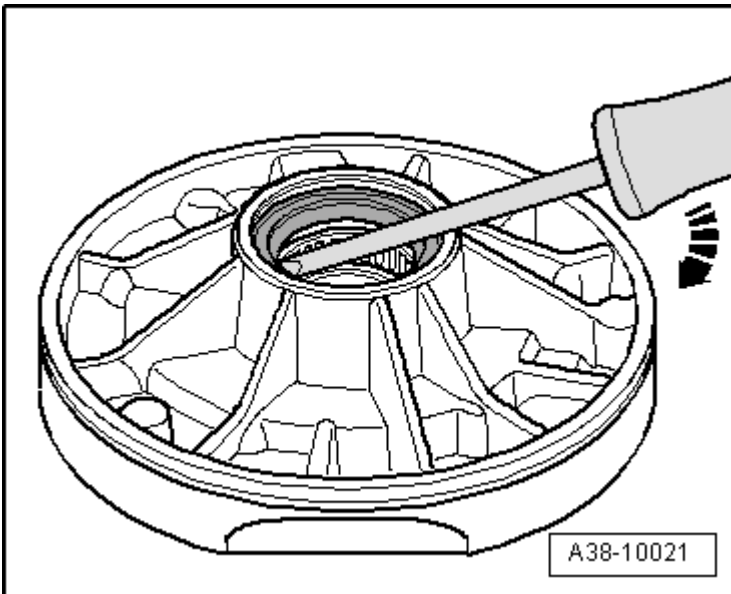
Pry Off Shaft Seal Using Screwdriver
